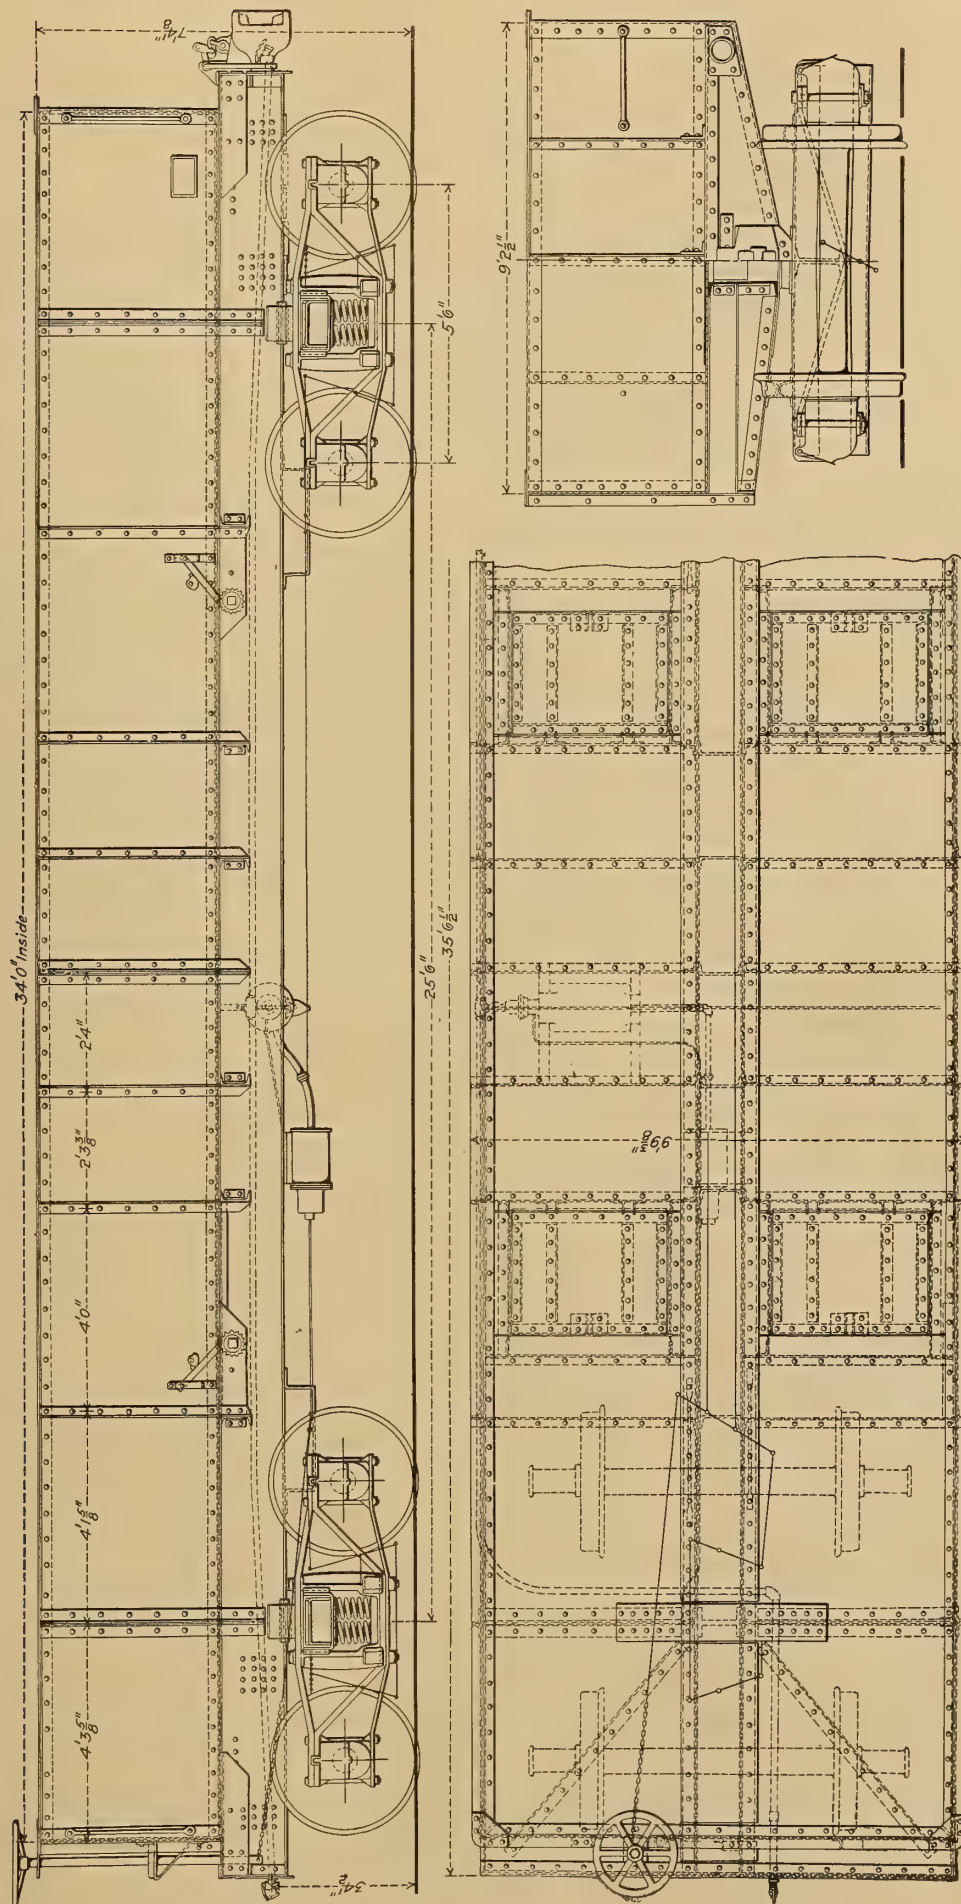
PLAN, ELEVATION AND SECTIONS 38-FT. GONDOLA CAR, P. R. R. PRESSED STEEL. CAPACITY, 100,000 LBS.
